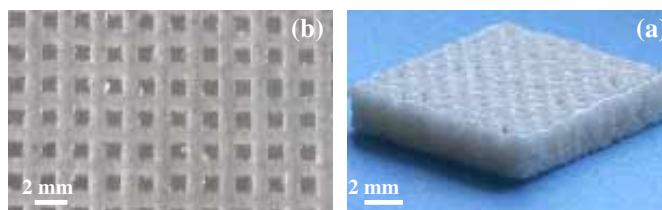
Pictures of laser-sintered two dimensional (a) and three dimensional (b) PCL structures
